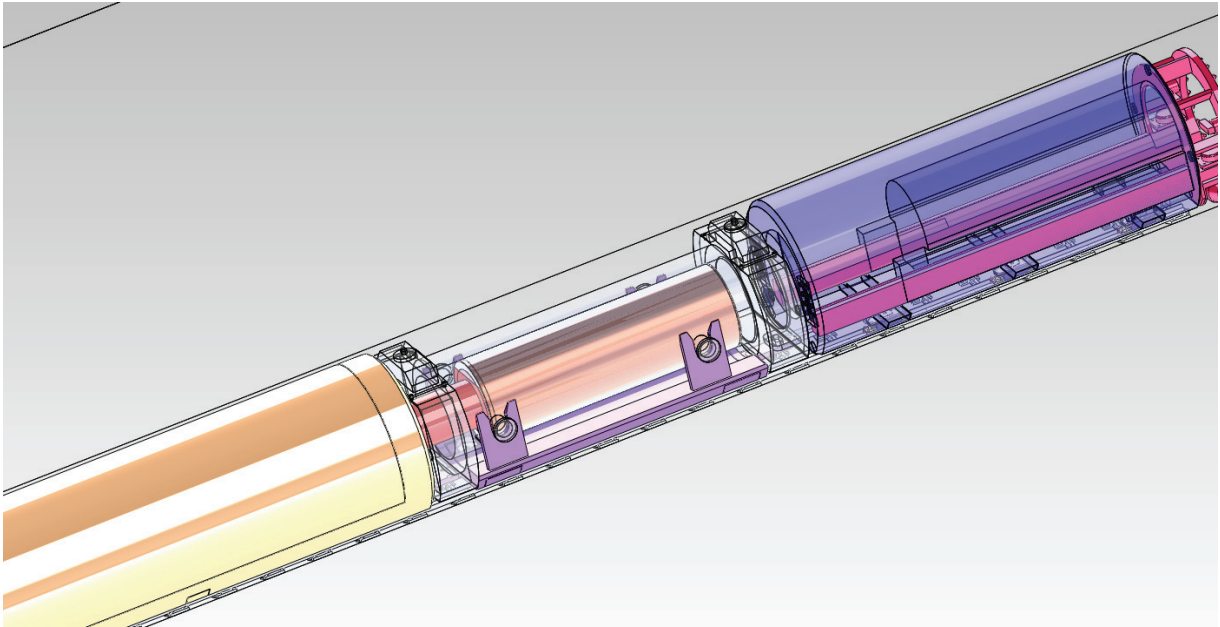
The Power Ram Machine draws the container into the transfer cask. Subsequently, it closes the transfer cask shielding doors.
